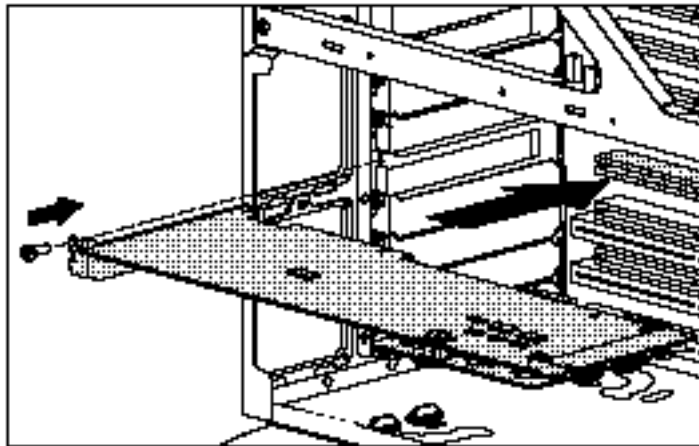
Installing a PCI expansion board (extender bracket attached, right foreground)
